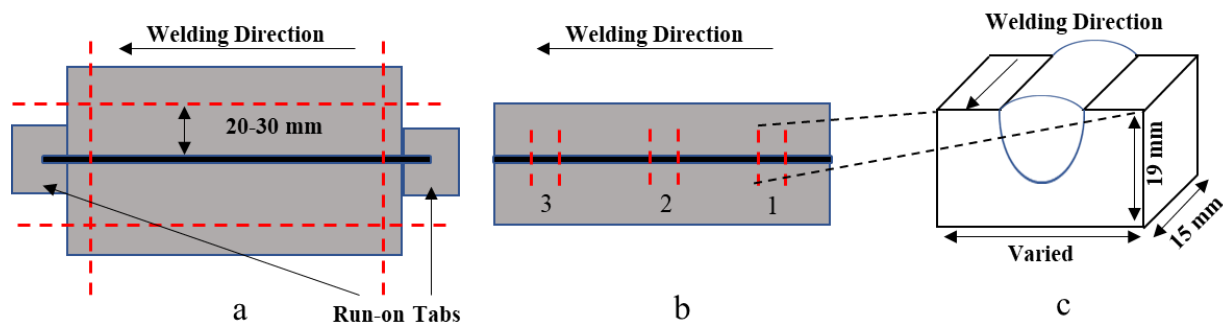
Schematic of process for sectioning a welded plate.
